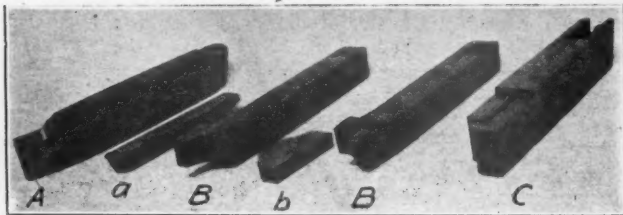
TOOL HOLDER FOR USE ON WHEEL LATHES AND SOLID TOOLS DISPLACED BY SAME.
